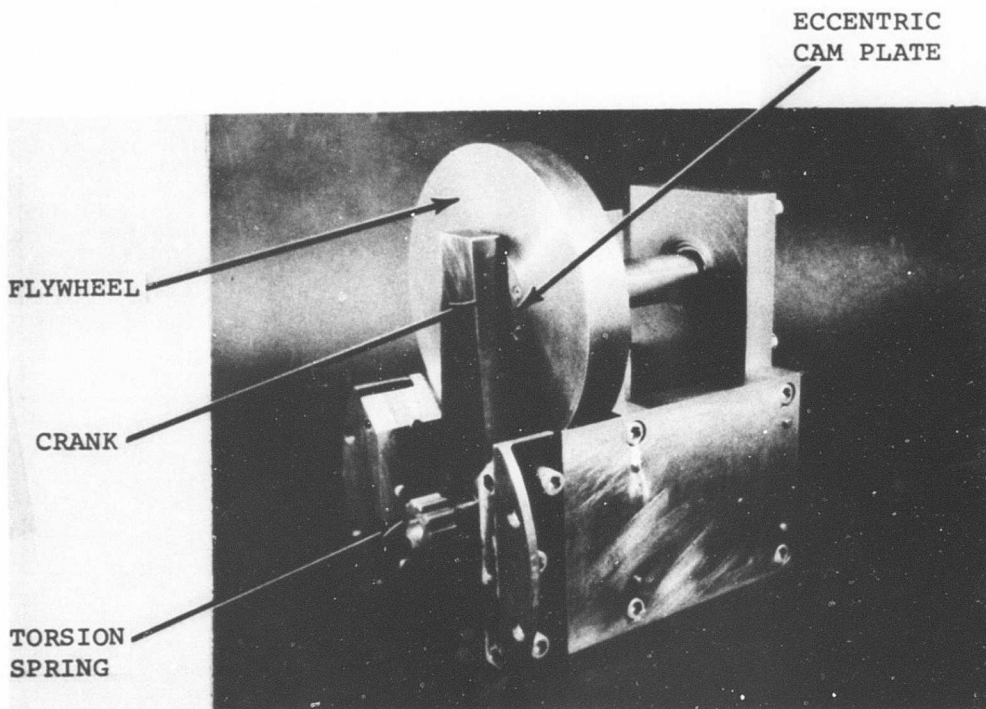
Detail of Flywheel and Crank for Pitch Oscillating Mechanism.
